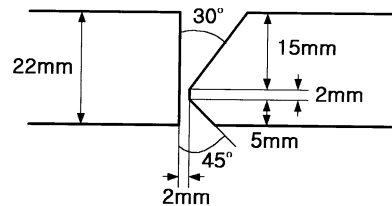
Schematic view of K-grooved weld joint preparation.
